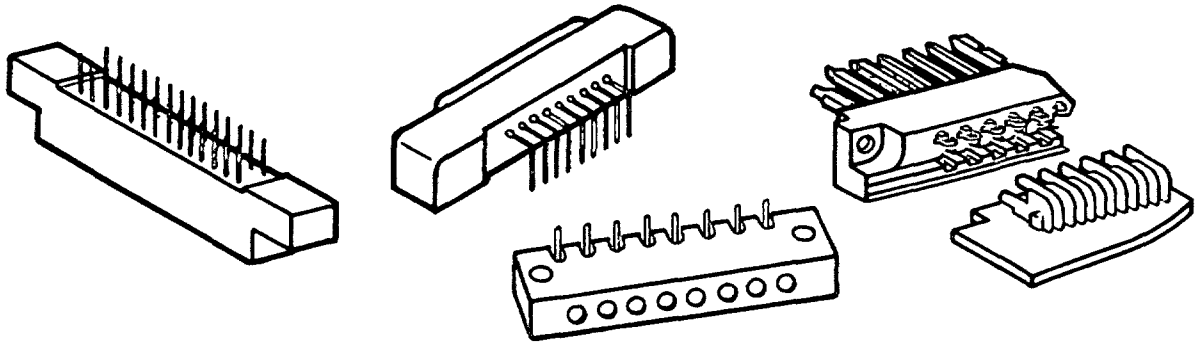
In-line printed wiring board connectors (see 5.1.1.9.4).
